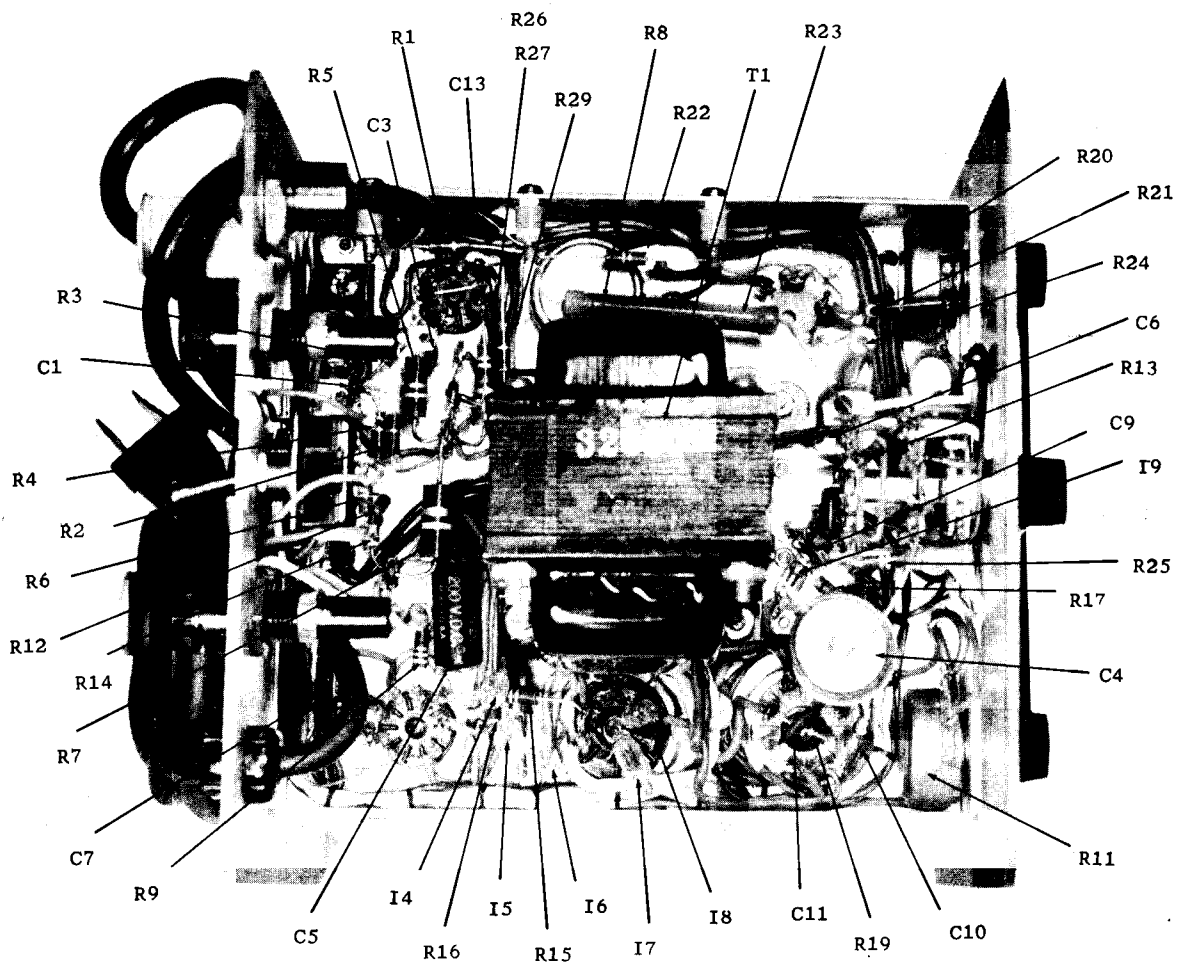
B BOTTOM VIEW OF DEMONSTRATION UNIT CHASSIS
